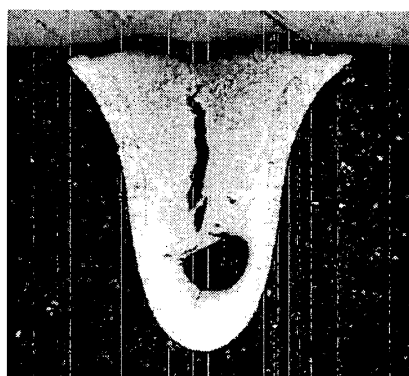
Cross section of laser spot weld in high carbon steel.
